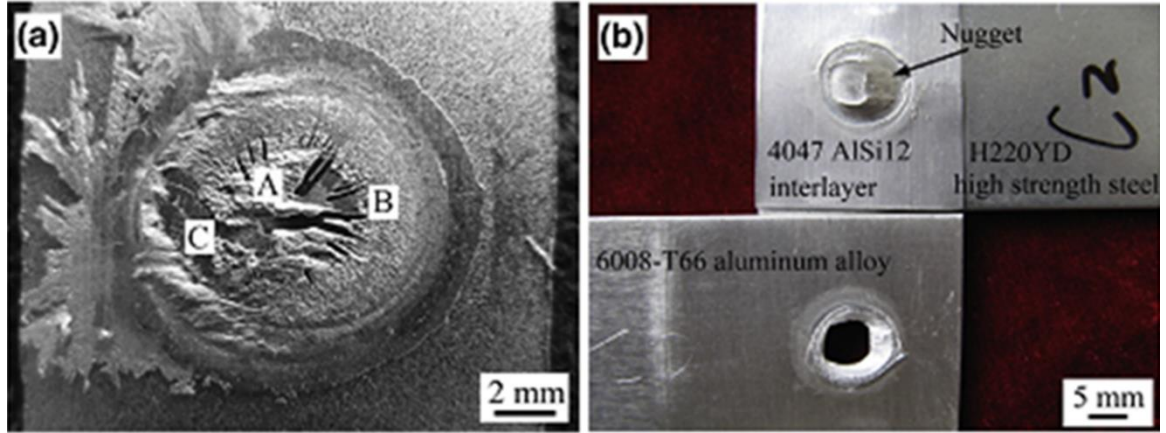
Fracture modes of H220YD high strength steel/6008-T66 resistance spot weld joints (a) interfacial fracture without interlayer and (b) pull-out failure with 4047 AlSi12 interlayer thickness of 300 μm [110]
